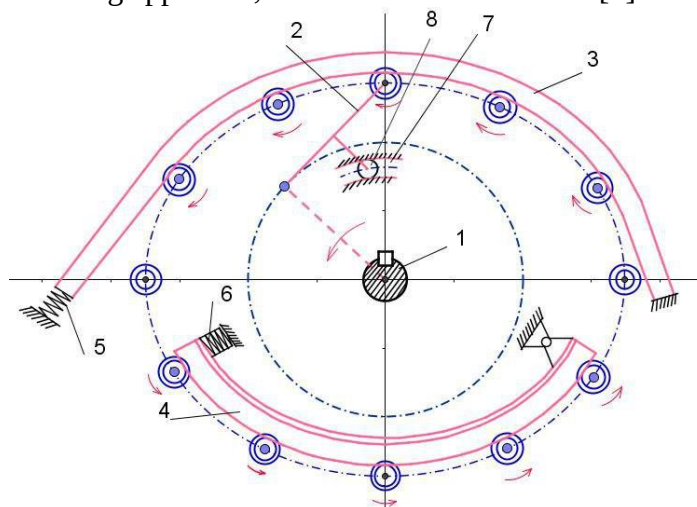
Diagram of the structurally developed (elliptical) drum: 1-shaft; 2-spindle cassette; 3;4-friction drives of the spindles; 5;6- springs; 7-guiding channel; 8-guiding roller.
